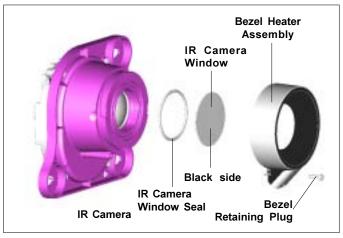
BEZEL HEATER ASSEMBLY AND RETAINING PLUG
